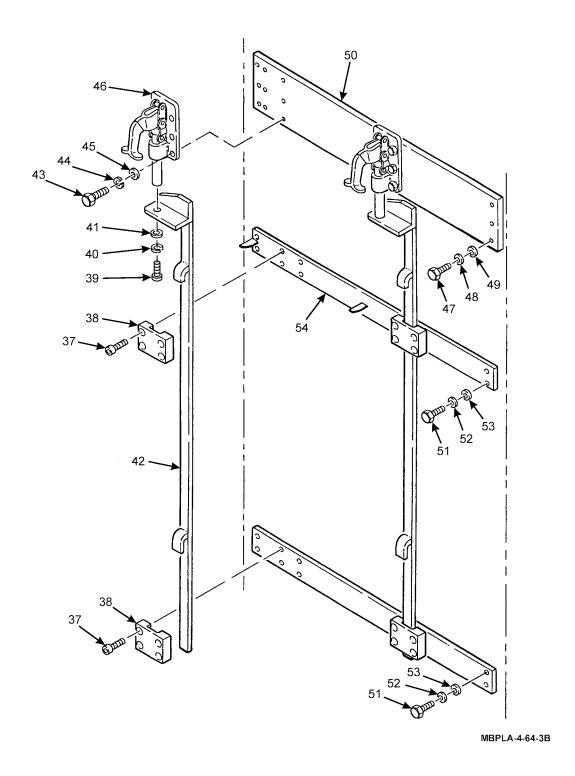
Gas Cylinder Rack (Sheet 3 of 3)
